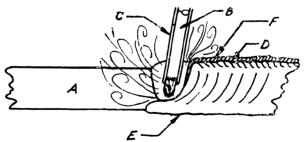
Welding cast iron by the metallic electrode arc process: A. Cast iron, B. The coated electrode, C. The flux coating, D. The bead, E. The penetration, F. The slag
